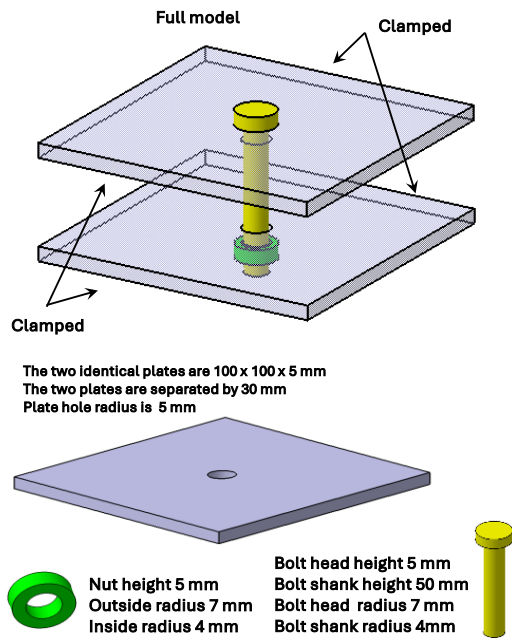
Two steel plates clamped at the four edges are tied together as a pretensioned bolt/nut assembly
